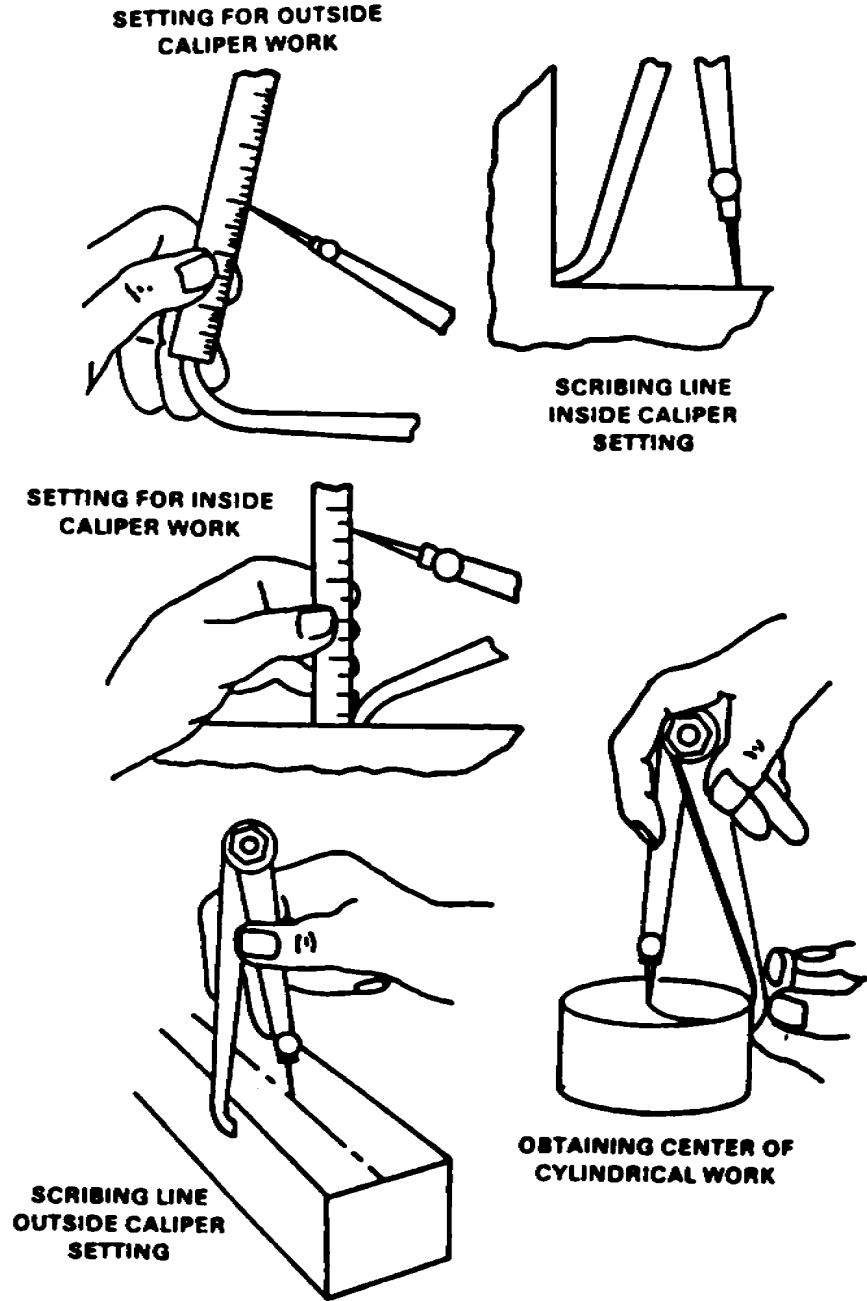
SETTING AND USING A HERMAPHRODITE CALIPER
